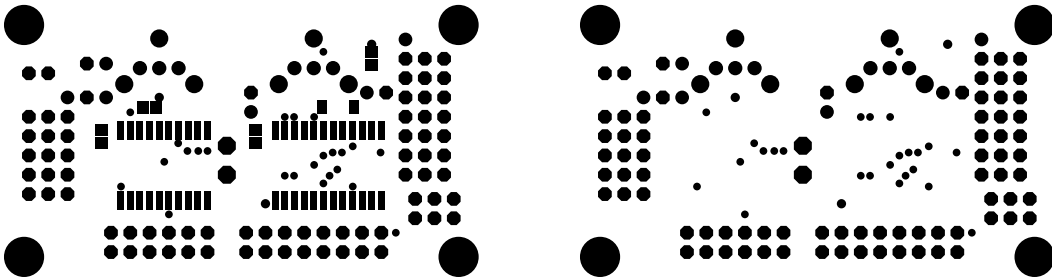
ADAT optical interface top and bottom solder mask. Left image is top solder mask.
